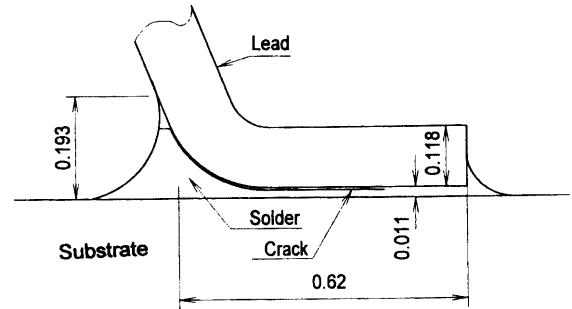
Geometry of lead wire and solder joint with an illustration of crack path
